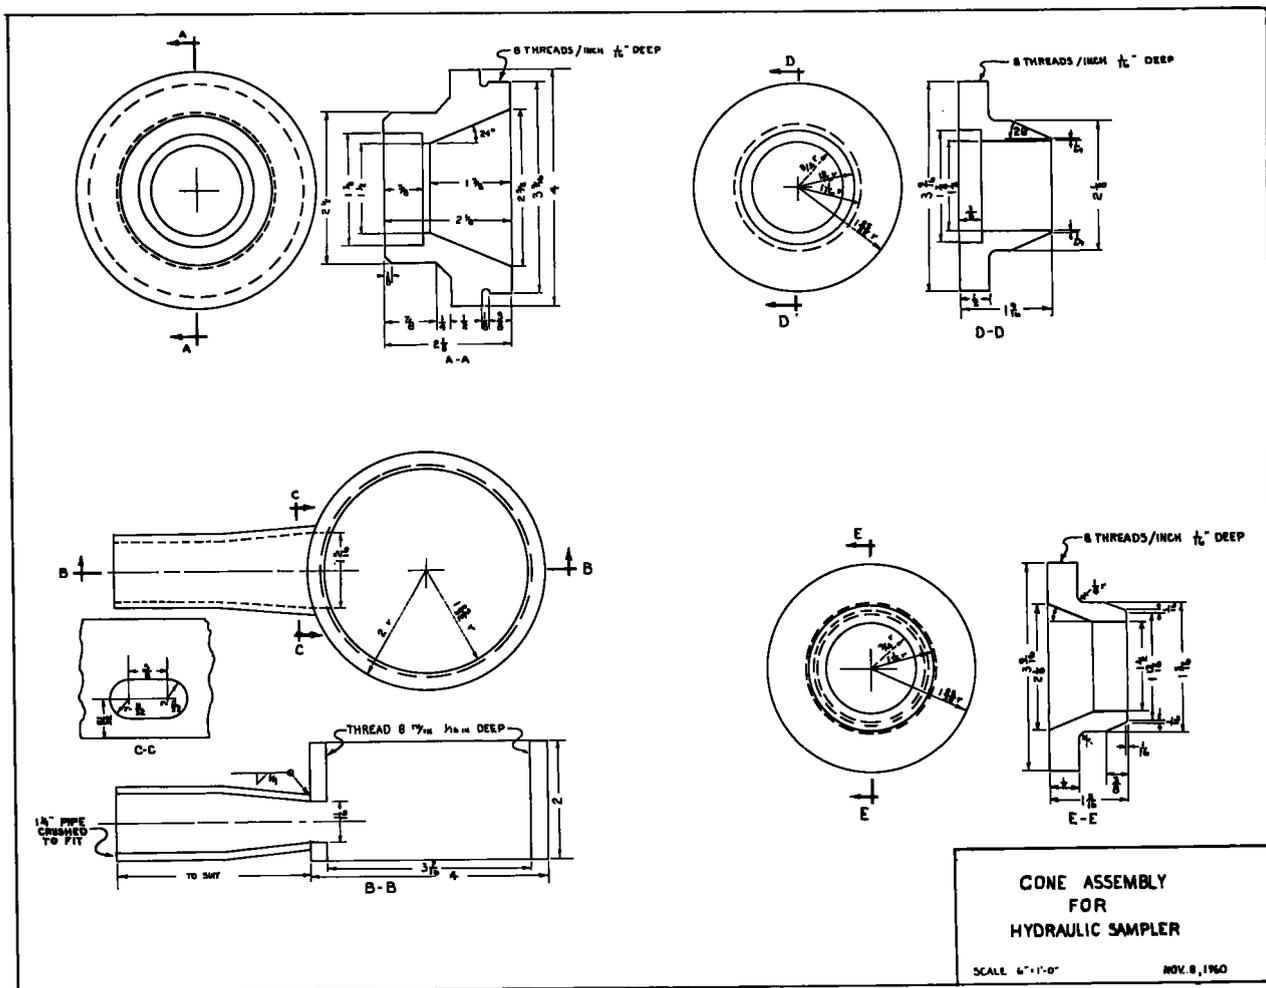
Machine drawing of cone assembly of hydraulic sampler.
